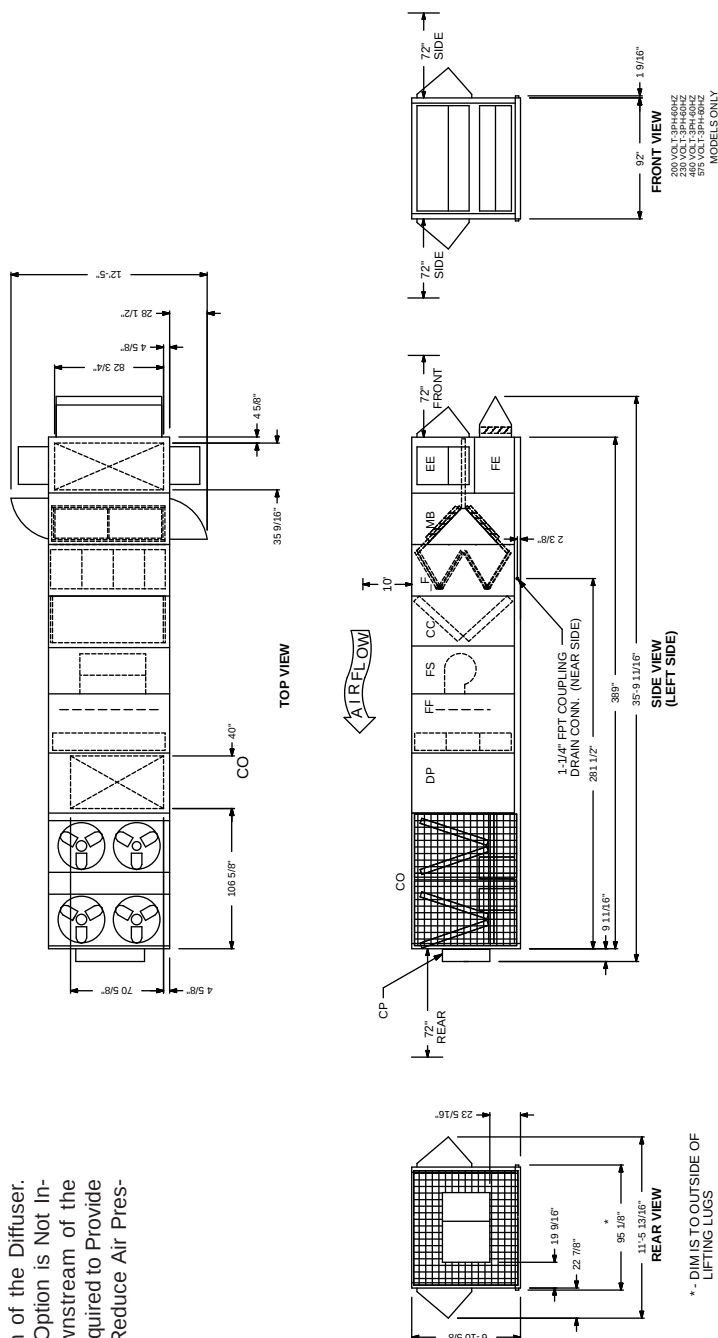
GENERAL ARRANGEMENT DRAWING
